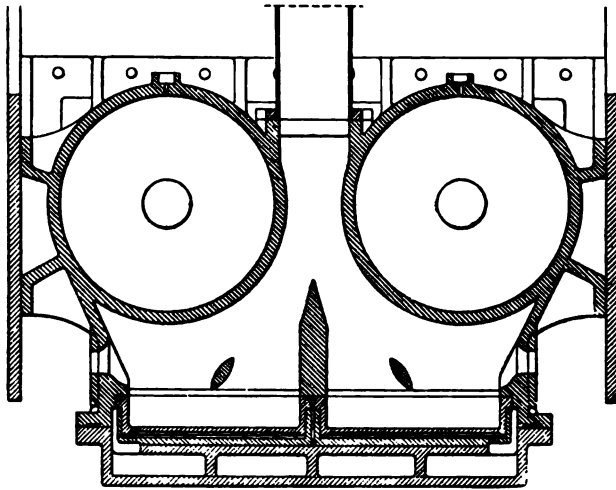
Stroudley's Locomotive Engine: Section of Cylinders. Scale 1/16th.
